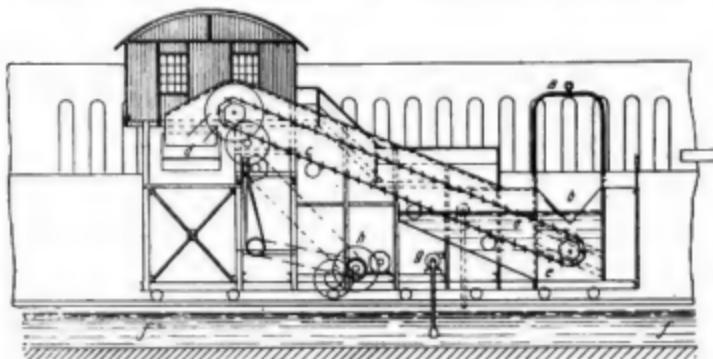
SHOWING THE PORTABLE QUENCHING, SIFTING AND LOADING MACHINE OF MÉGUIN.
